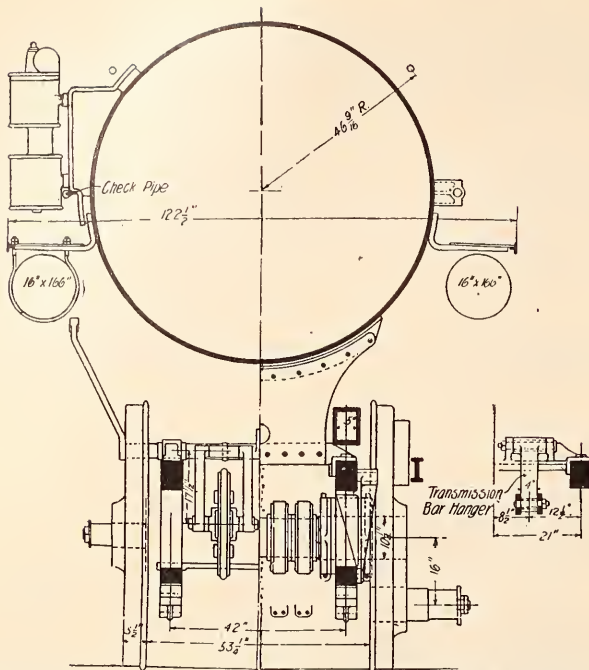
NEW YORK CENTRAL CONSOLIDATION LOCOMOTIVE—SECTIONAL VIEW OF BOILER SHELL AND FRAME.
